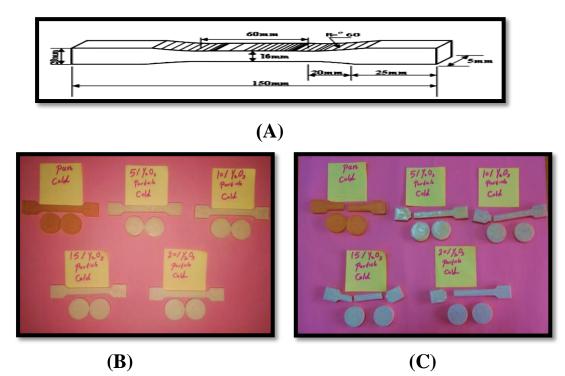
tensile test specimen: (A) Schematic specimen, (B) Some tensile specimens before test and (C) after test.
